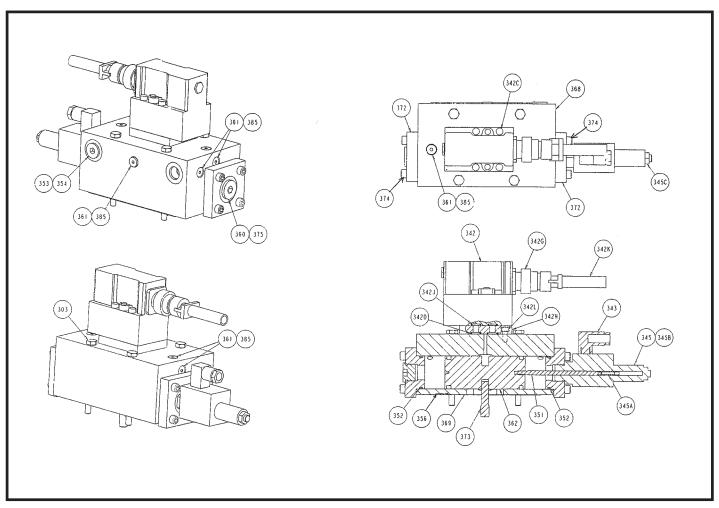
Parts Drawing, "VS" control, Plan View (E51902 sh. 1). Parts list on page 3.
